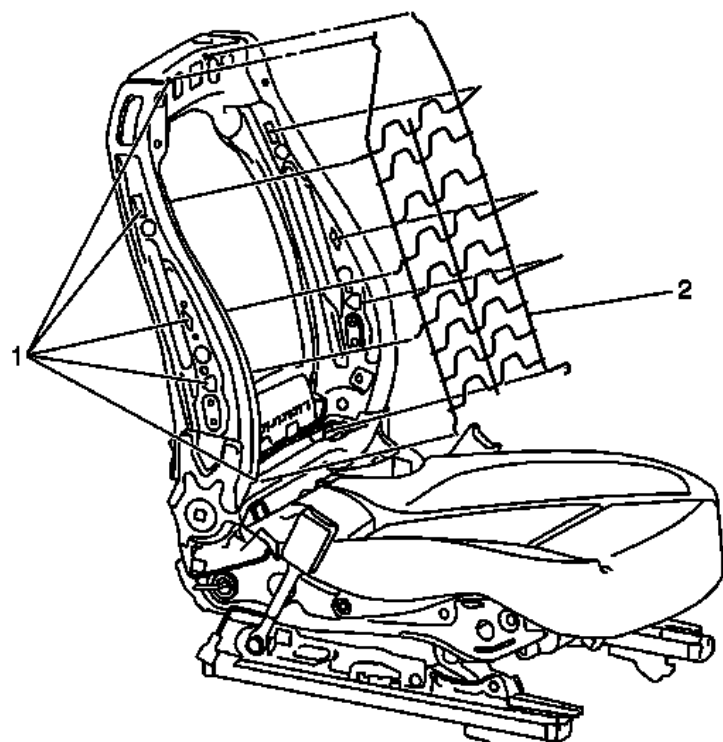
Driver or Passenger Seat Back Cushion Pad Wire (8-Way-Power)
